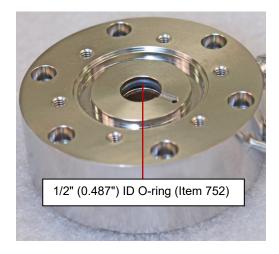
Removing O-Ring from Bottom of Pneumatic Cylinder
